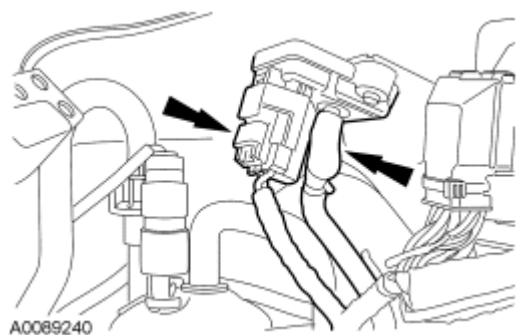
Locating Manifold Absolute Pressure (MAP) Sensor Vacuum Tube & Electrical Connector
